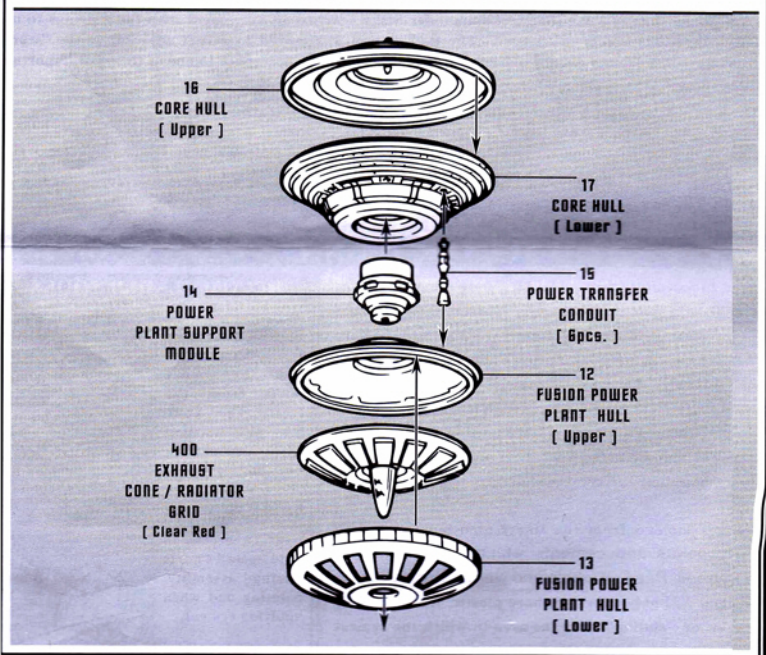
PROMENADE / POWER CORE ASSEMBLY
